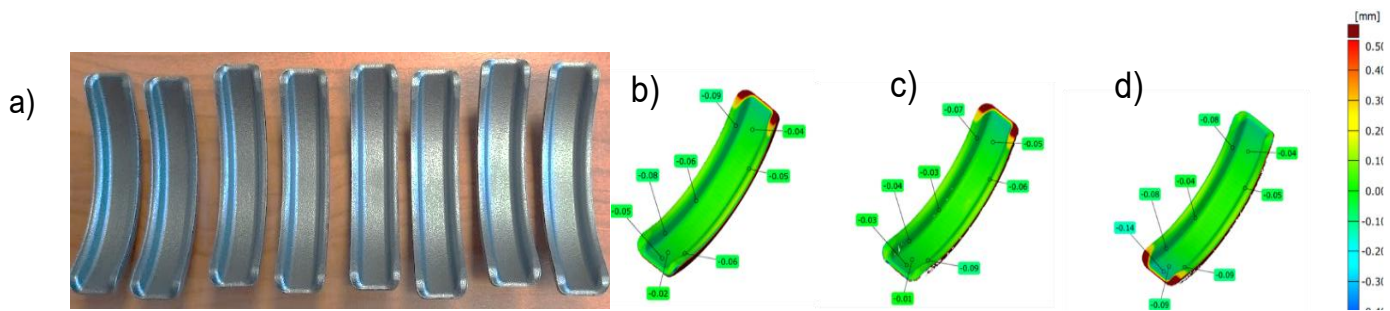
The view of: a) forging after cold trimming, b) selected 3D scanning results of forgings after cold trimming compared to the nominal model: b) forging no. 1, c) forging no. 2, d) forging no. 3.
